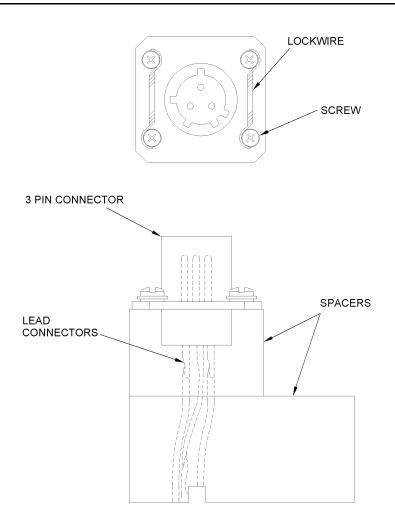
Remove Connector and Spacers from Stator and Housing Assembly
